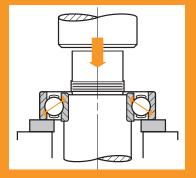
A. Incorrect dismounting of bearing on arbor press.
